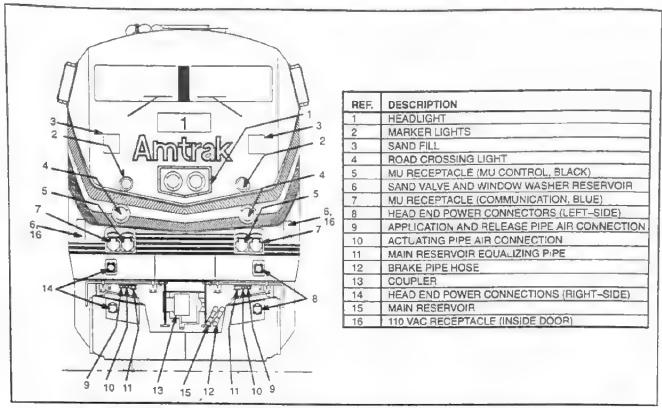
LOCOMOTIVE SHORT-HOOD ASSEMBLY AND END CONNECTIONS. E-42572.
